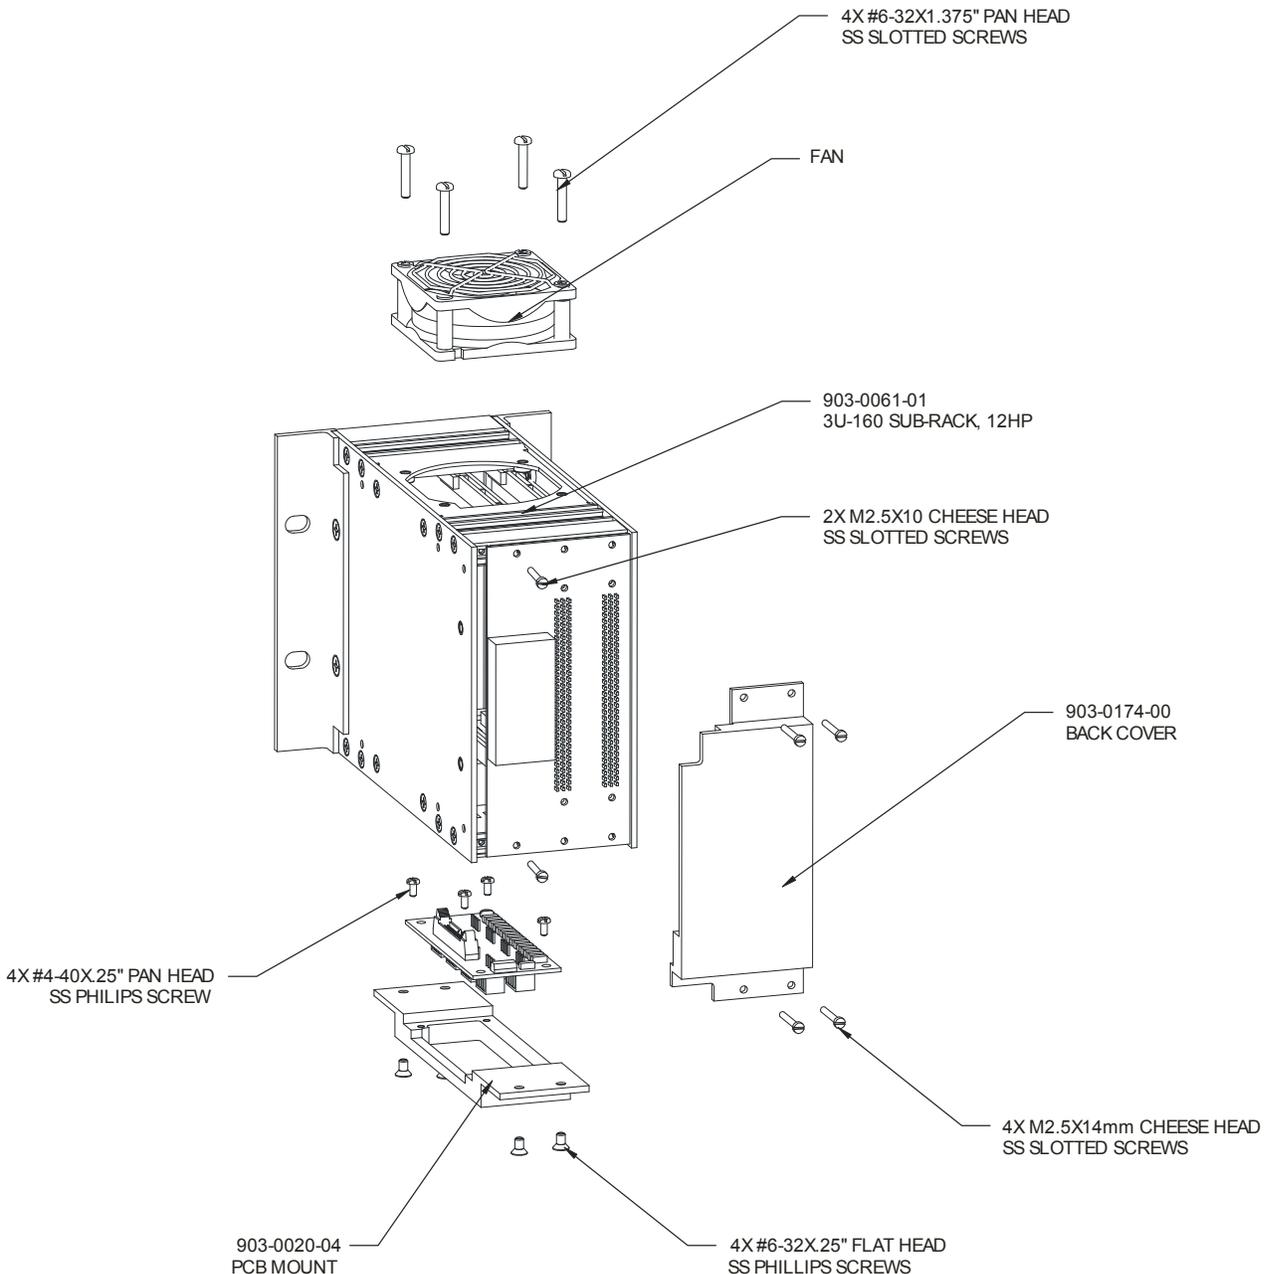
Exploded View of a Model 903 High Density 4VID Remote Card Cage
